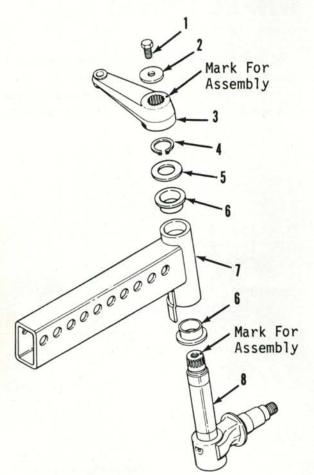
Exploded view of steering spindle used on all twowheel drive tractors. Note assembly marks.
